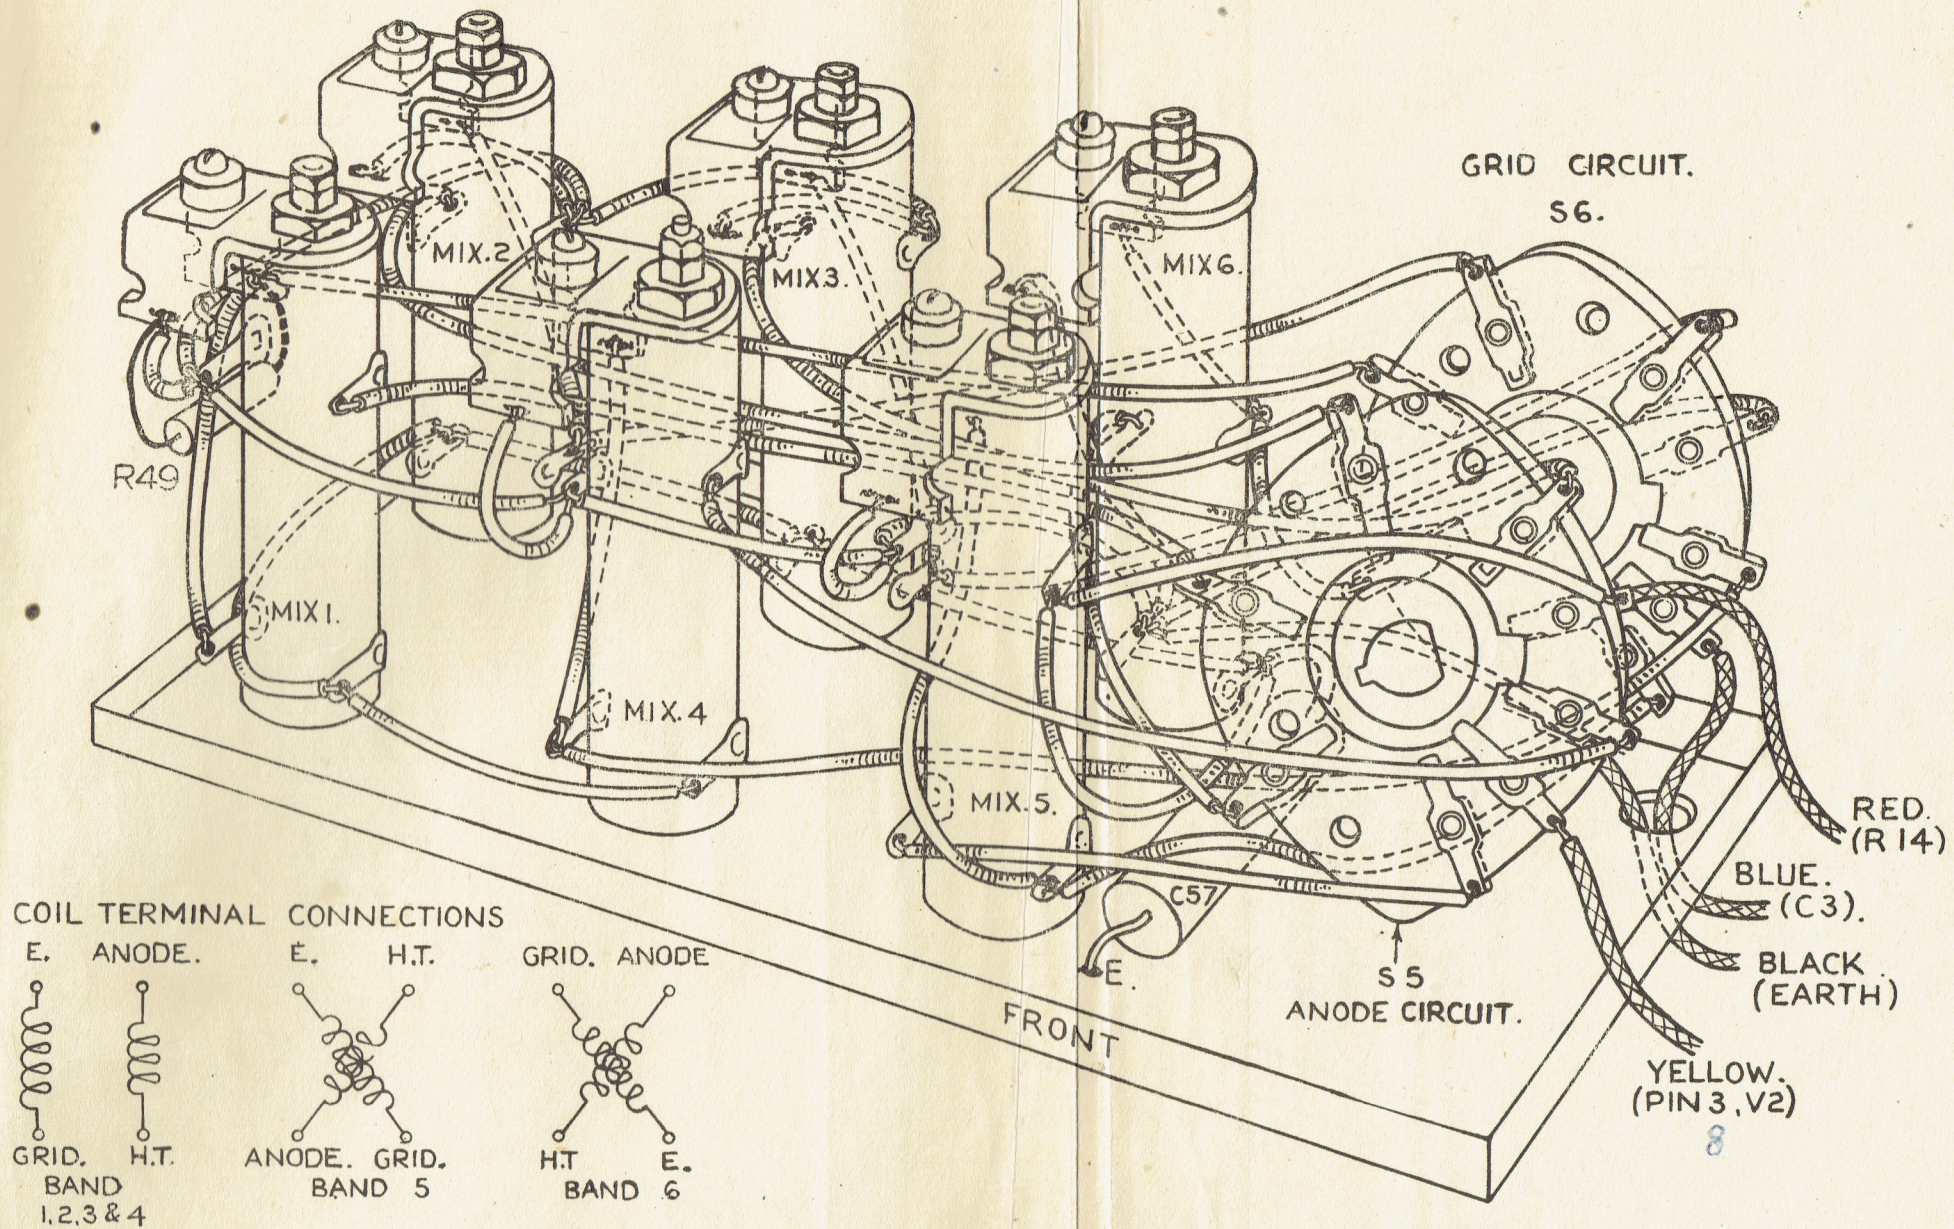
COIL ASSEMBLY. MIXER SECTION.
